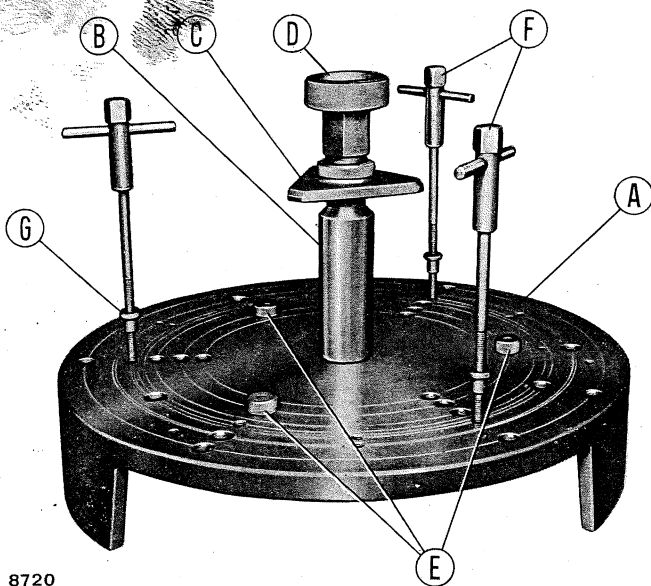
Component Parts of Ferodo Clutch Adjuster 291291/2
